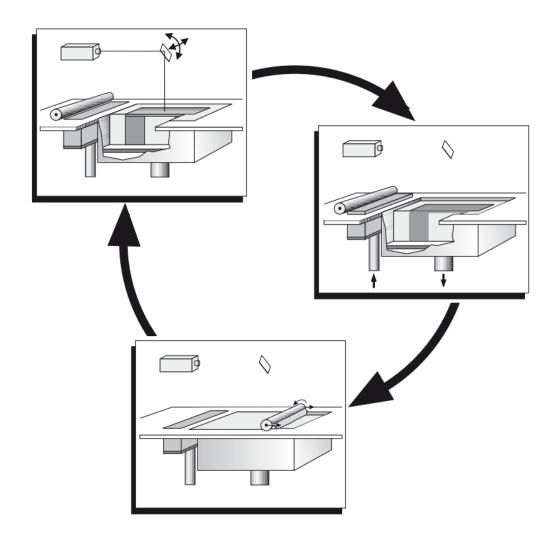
Laser sintering and laser melting, scheme; melting and solidification of a single layer, lowering of the platform, recoating
